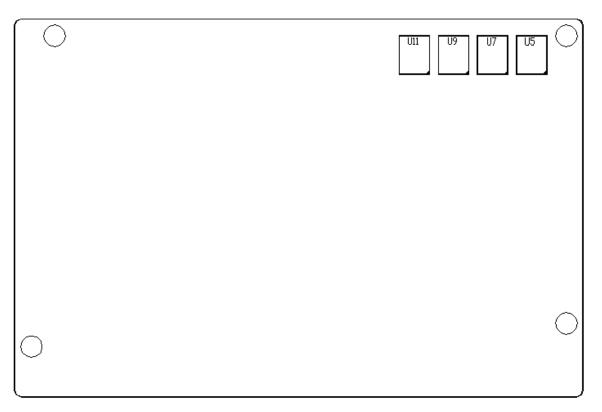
Jumpers and Connectors Location_ Board Bottom
